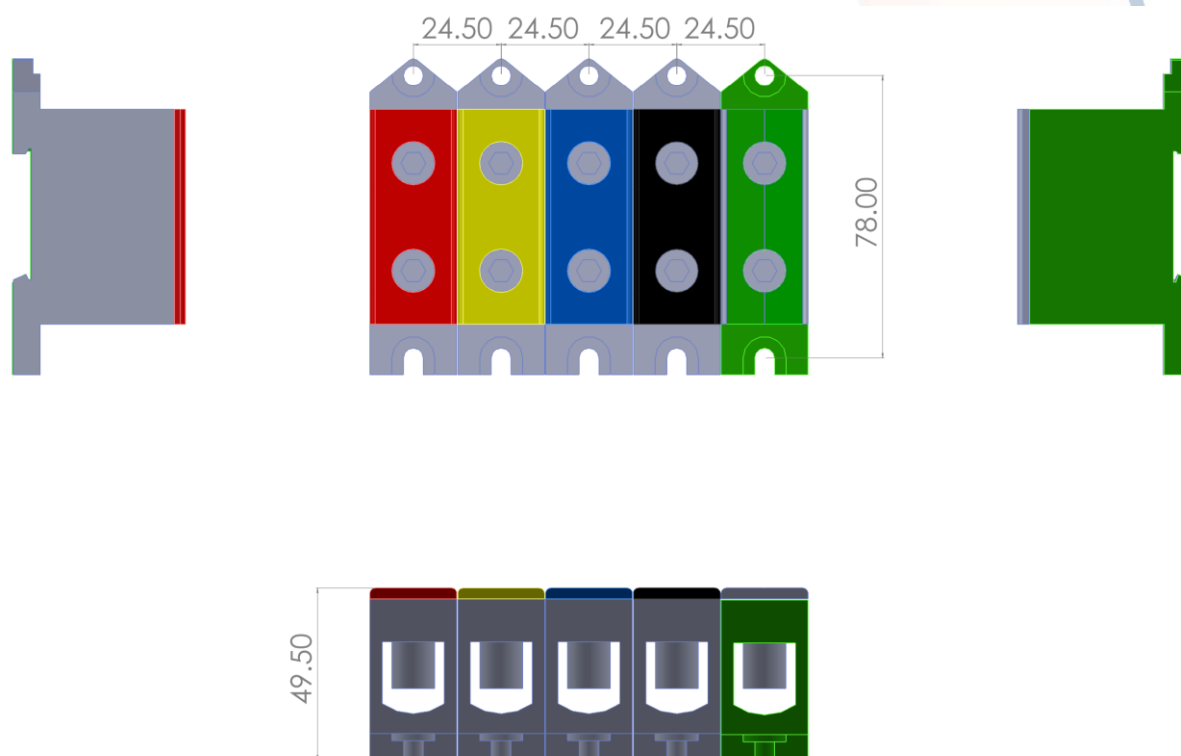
Perspective Drawing of Outgoing (Consumer) Terminal Block Assembly
